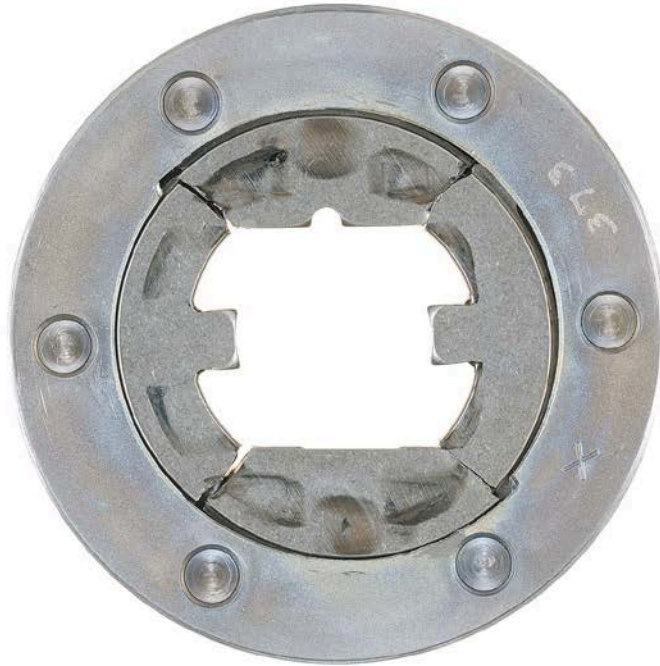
Broken Rotor Governor Weight Cage Drive Plate, Pump No. 2, Test 21
